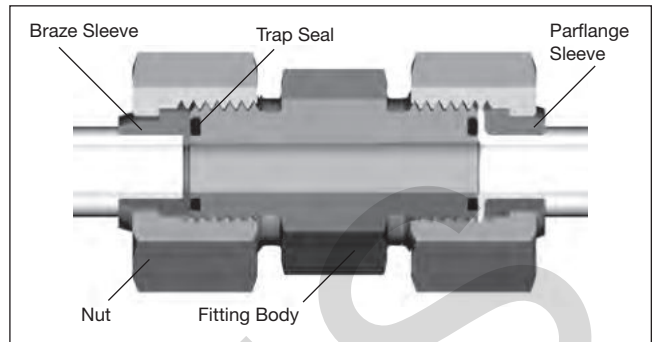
O-Lok® Union cutaway with brazed (LHS) and flanged assembly
